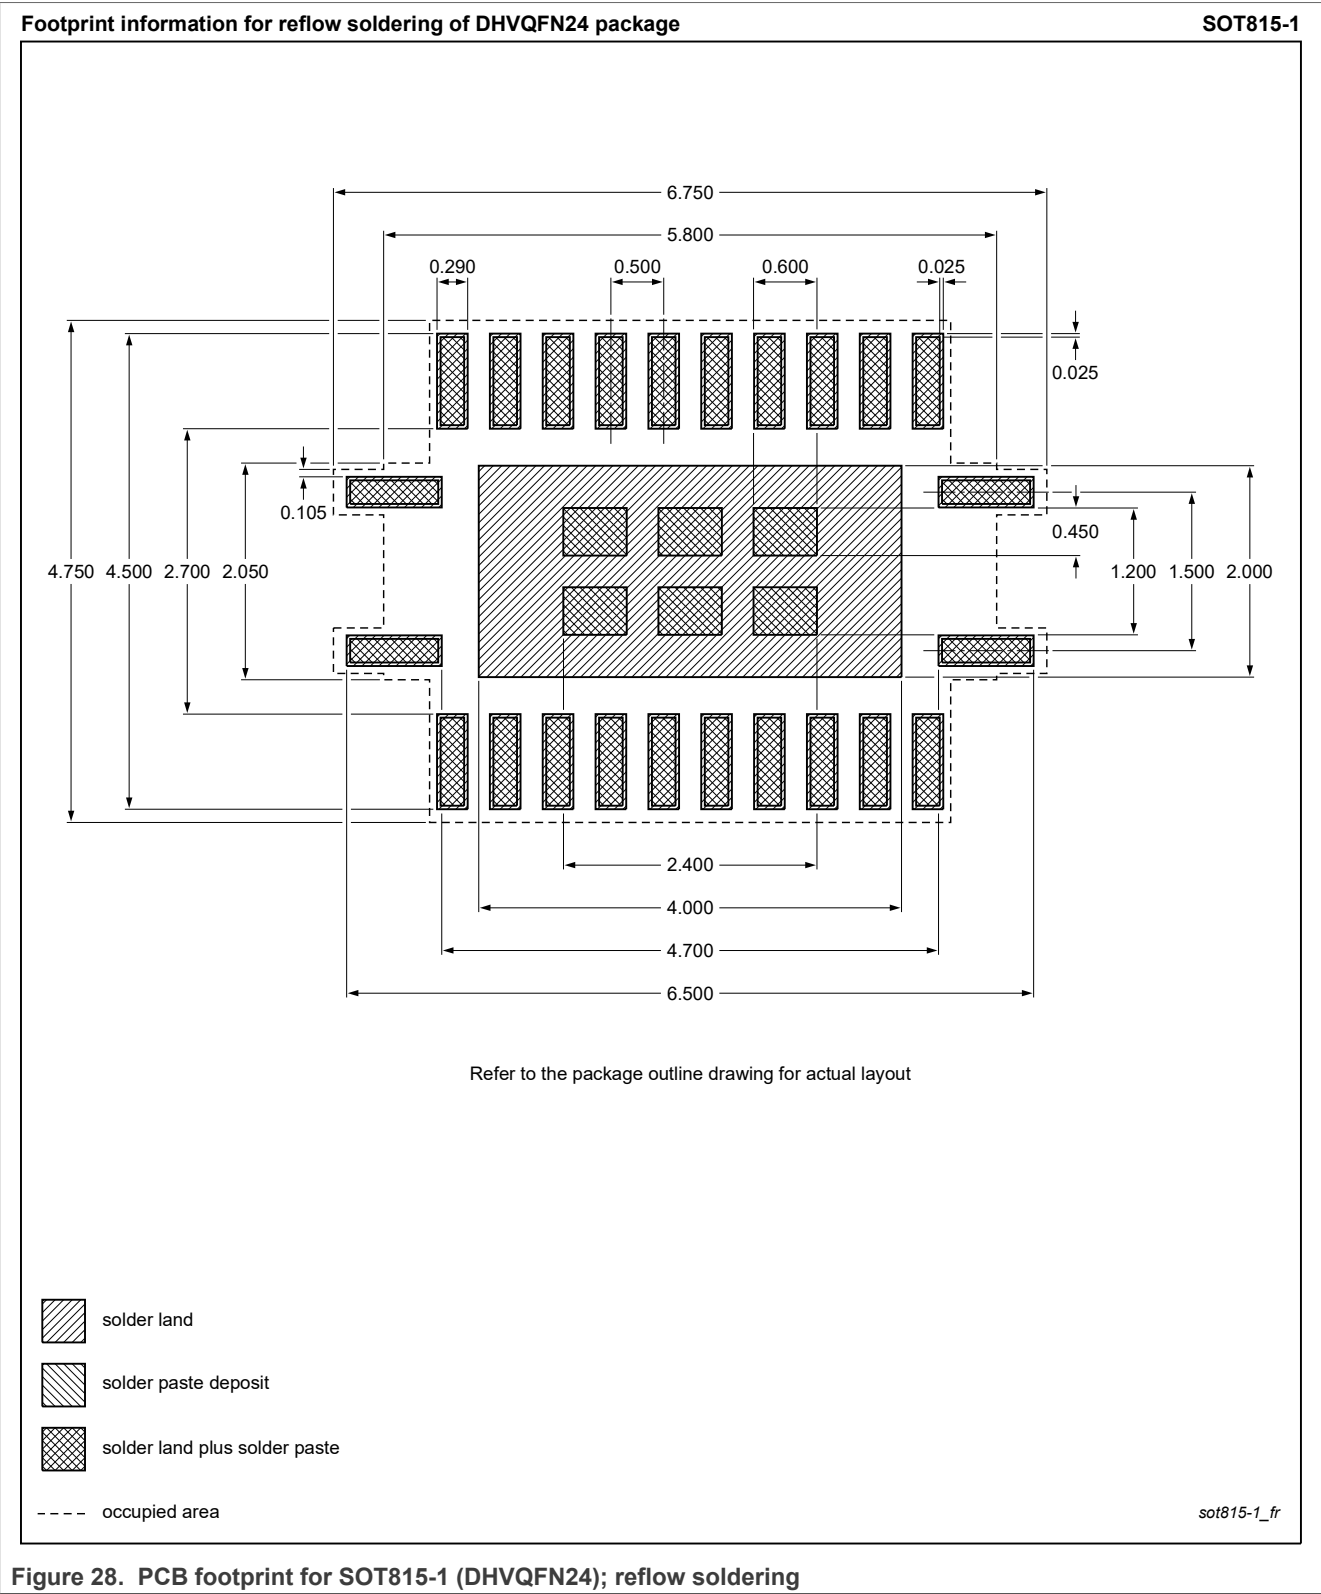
PCB footprint for SOT815-1 (DHVQFN24); reflow soldering
